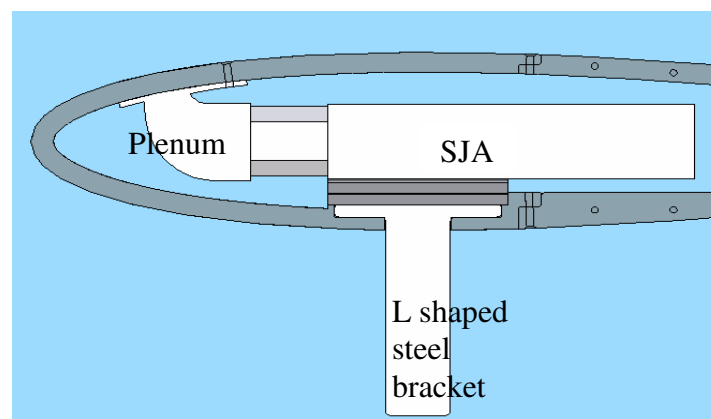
Details of plenum design. It fits into SJA at one end at to front of skin at other.
